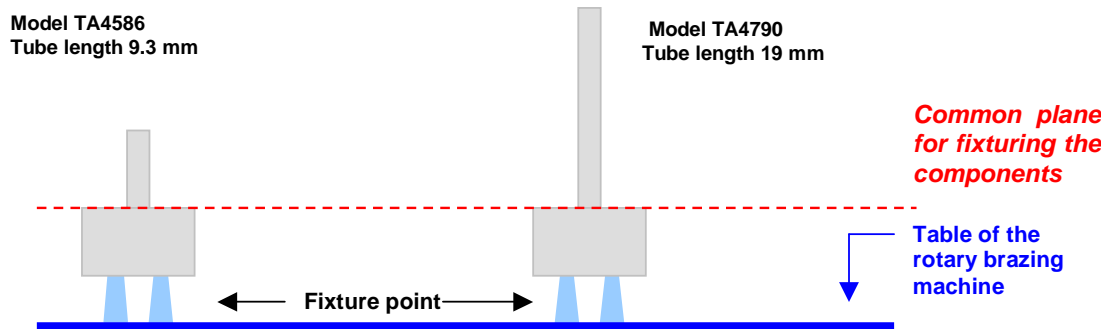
The fixturing concept to ensure that the joint lines of both model-types are in a common plane during brazing.
